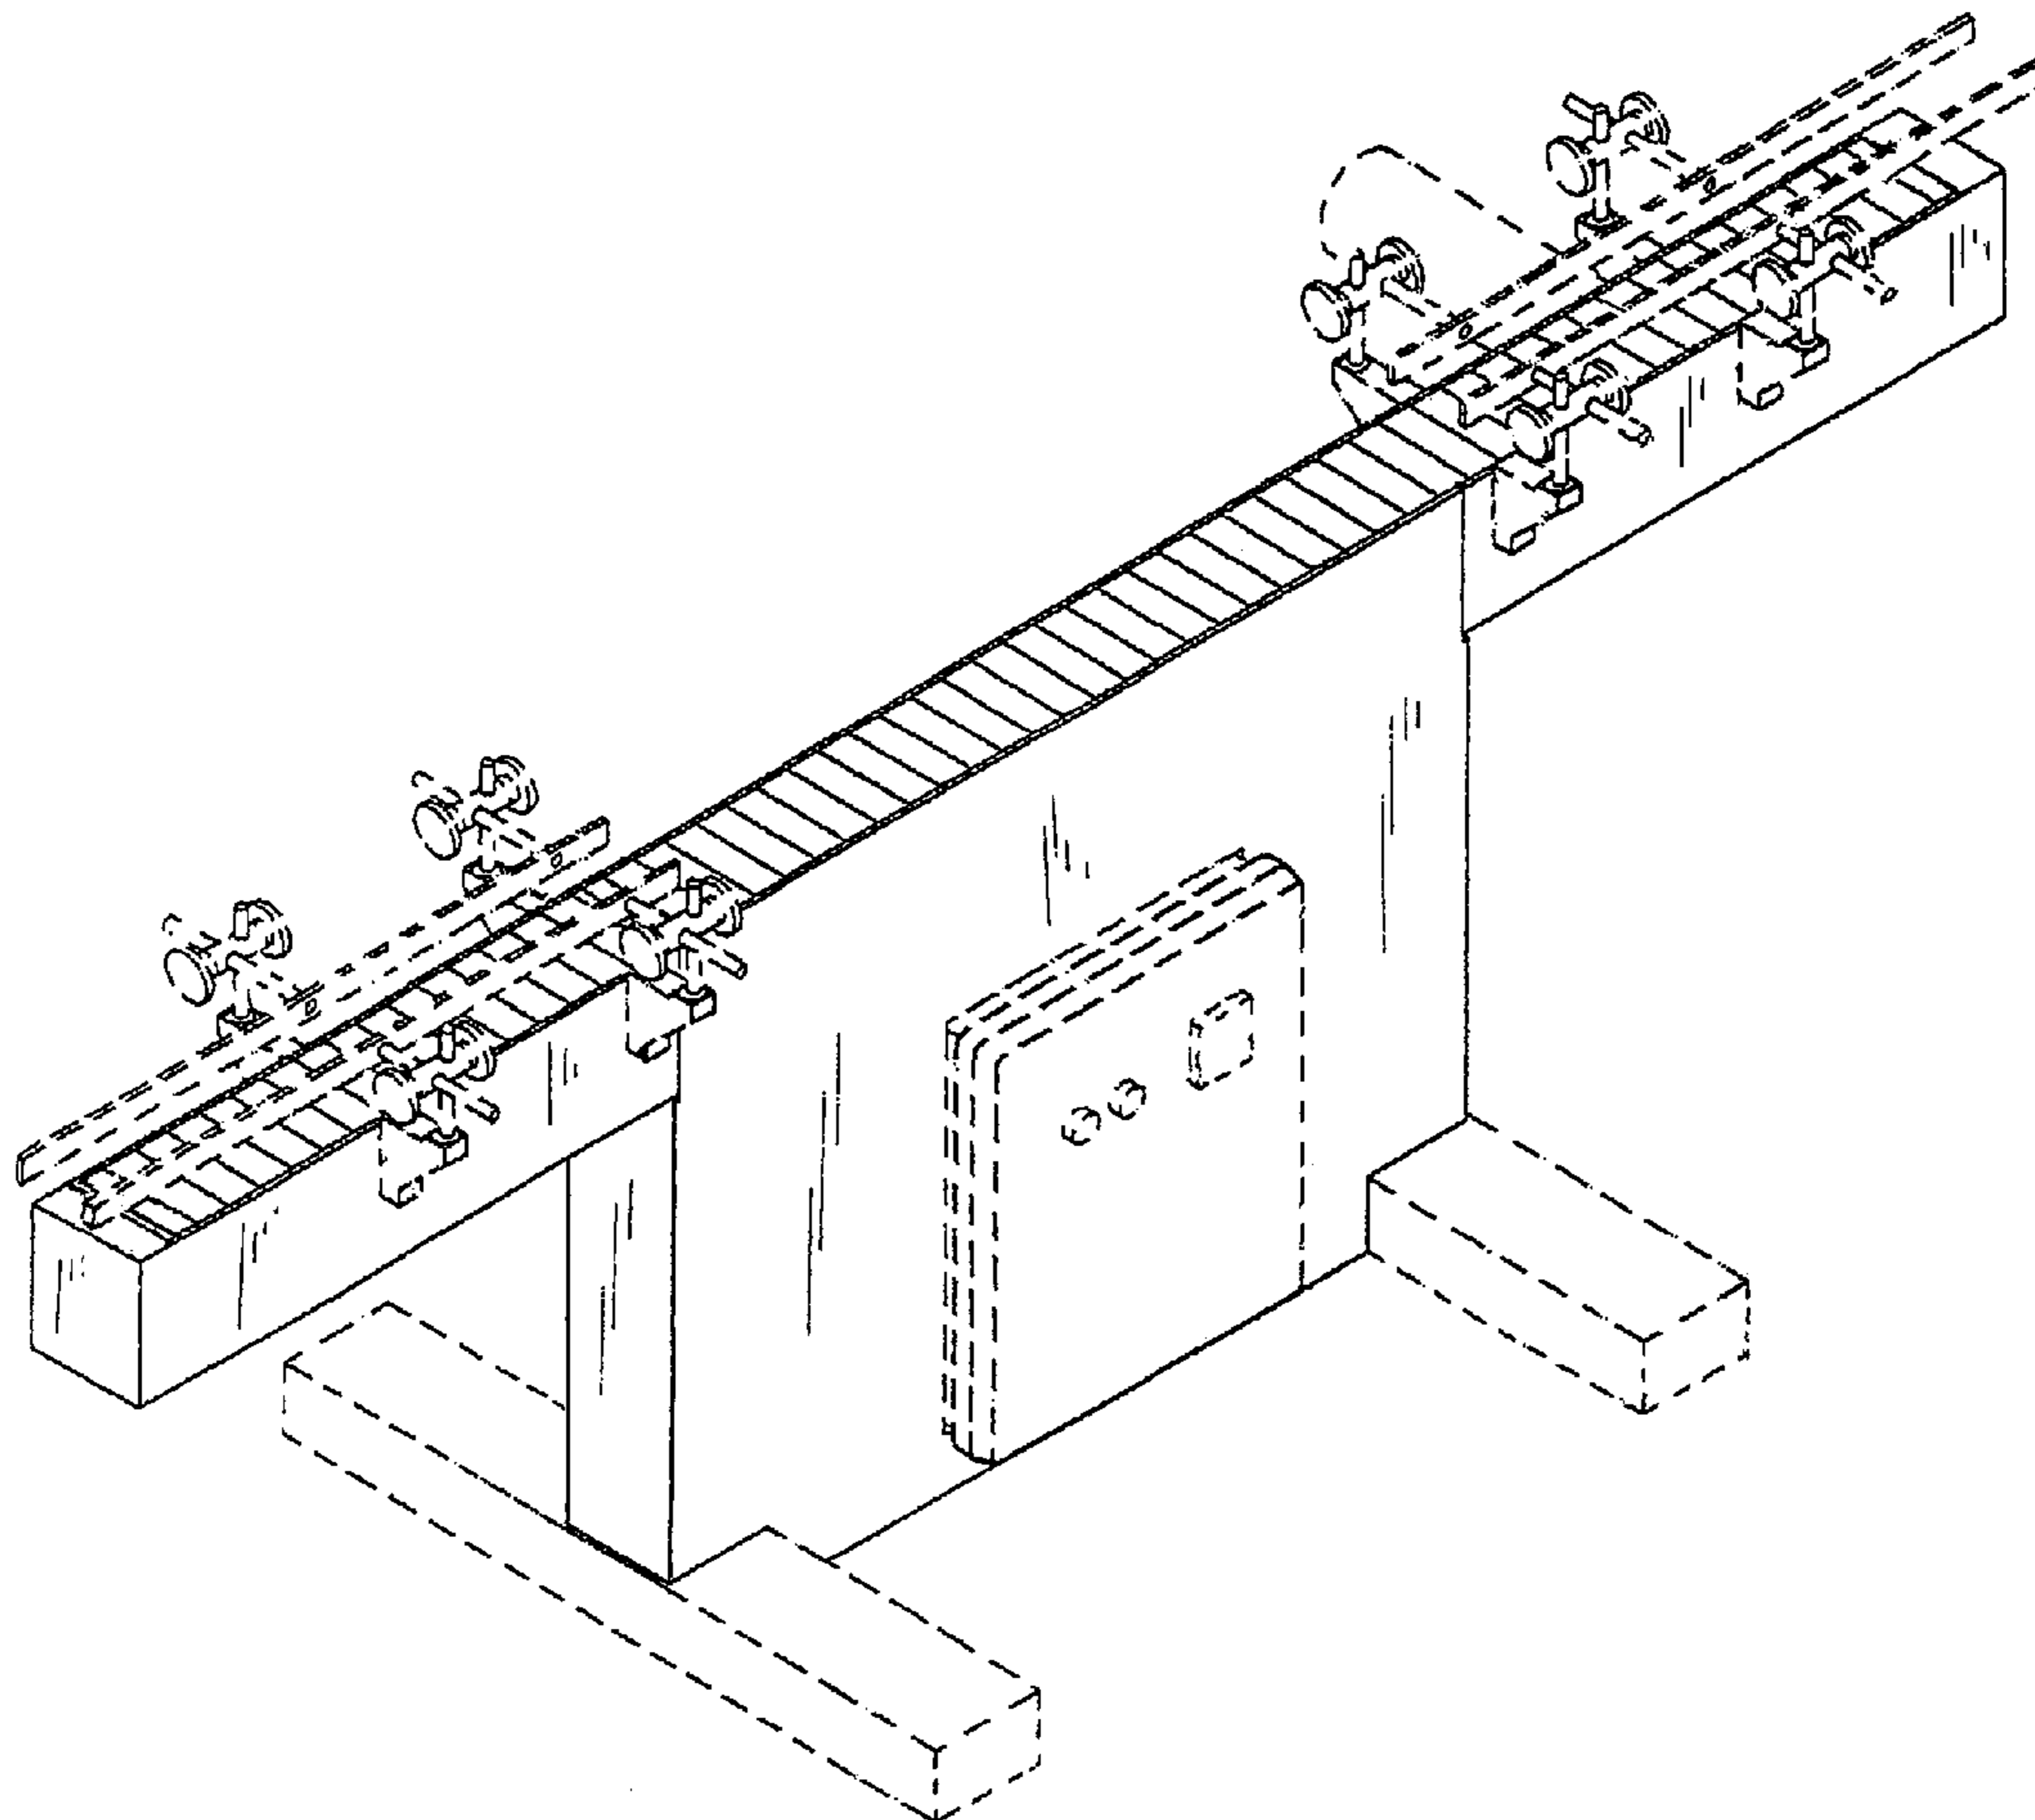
is a perspective view of a first side of a labeling machine showing my new design;
